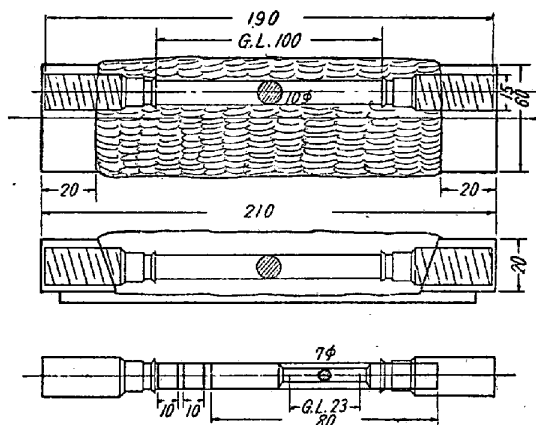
Method of machining the test pieces for creep (the above two), tensile and microscopic tests (the lowest)
